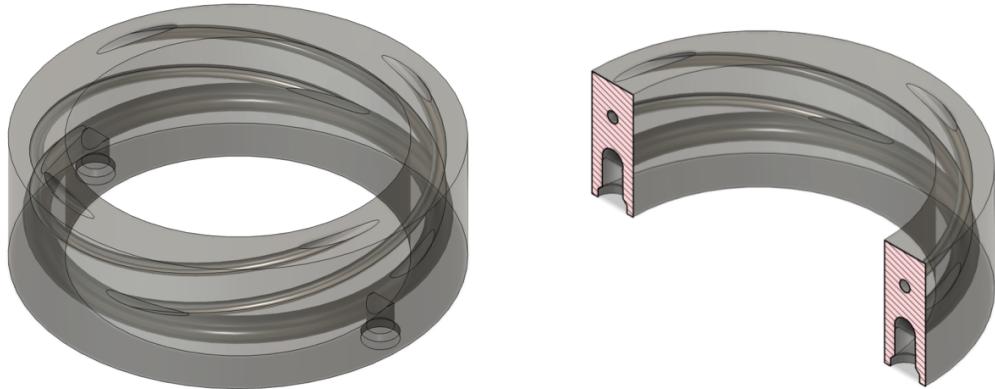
CAD model and section view of the four-channel diffuser used during testing. This figure by Oh, et al. [2] is licensed under CC BY 4.0.
